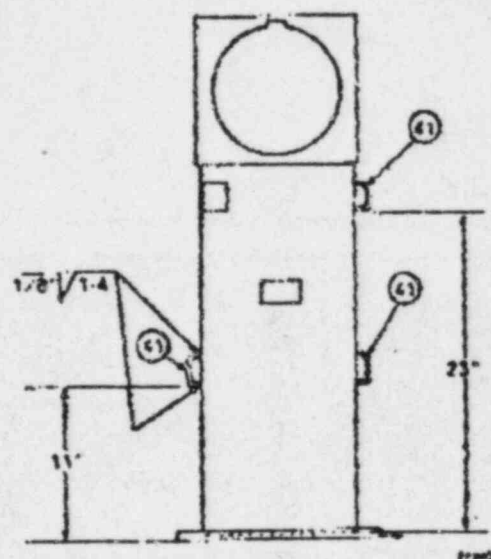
"S" Unit Oil Cooler Tank Stiffener Application
